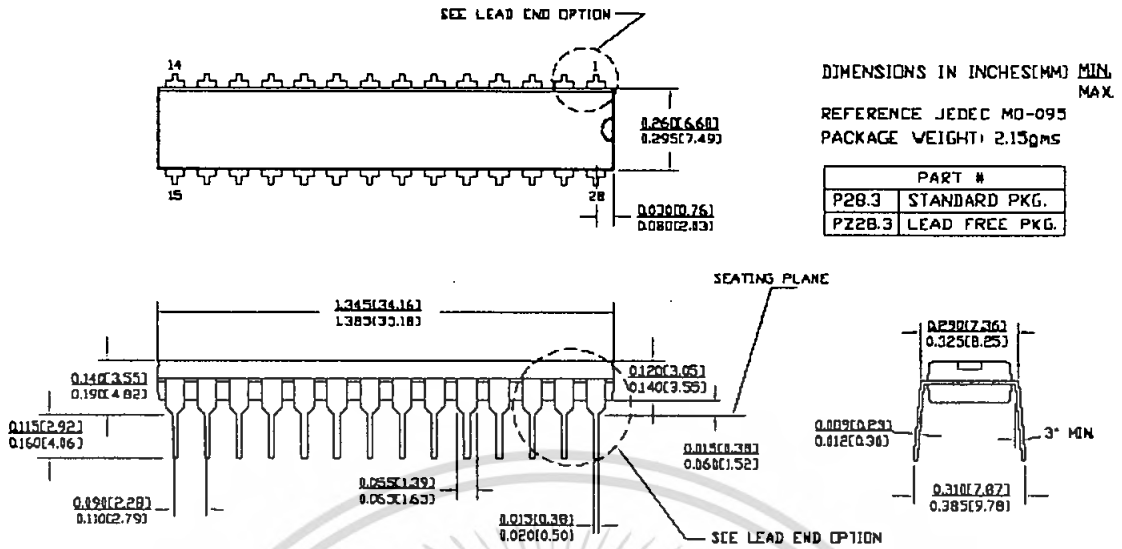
28-Lead (300-Mil) Molded DIP
